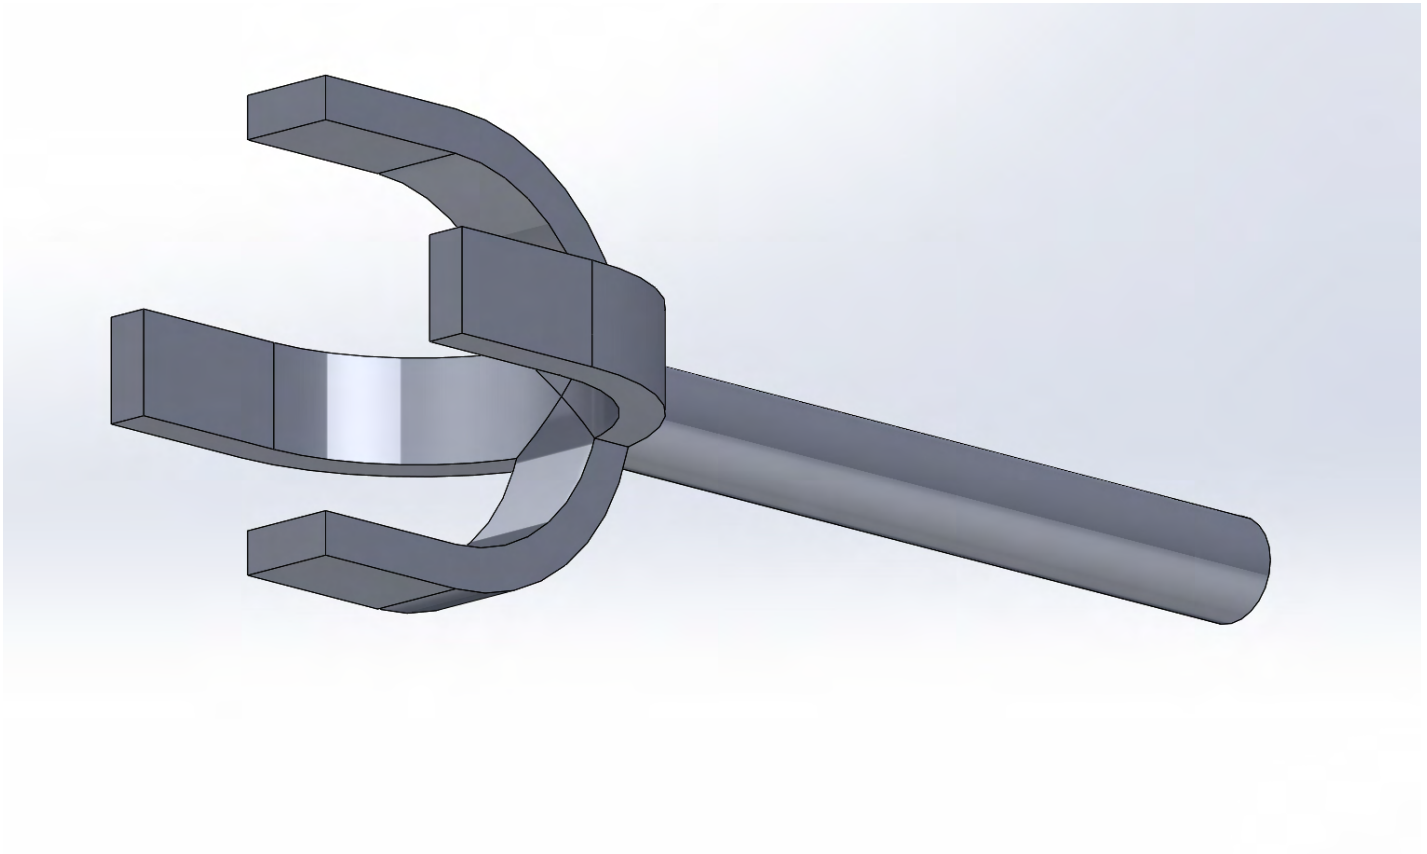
Initial Valve Connector SOLIDWORKS Design
